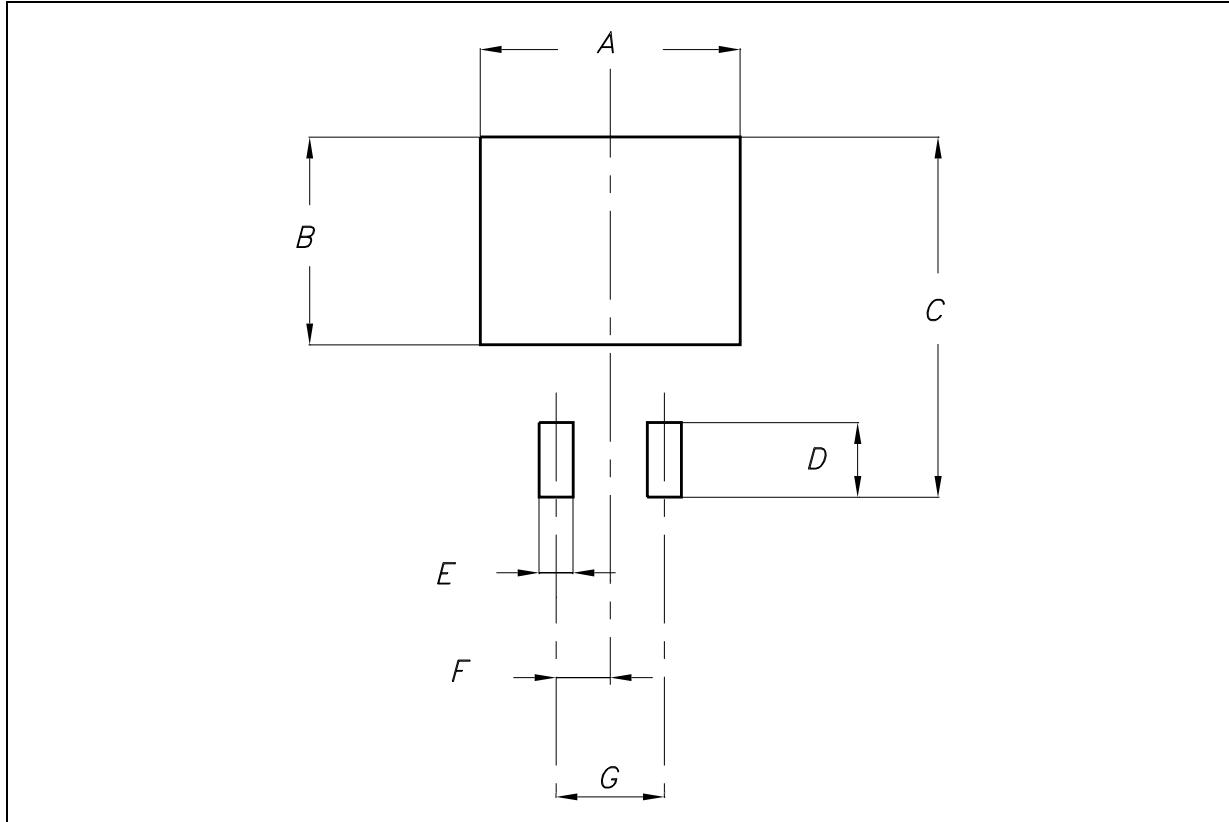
Drawing dimension D<sup>2</sup>PAK (type STD-ST)
